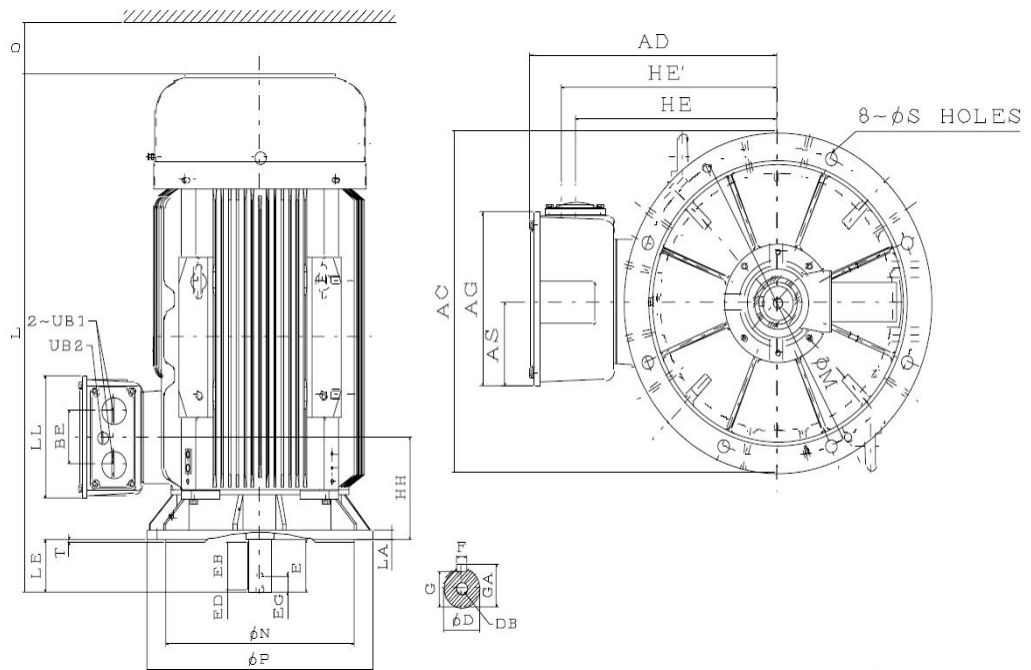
Outline drawing of cast iron design, mounting V1; frame size 315L
